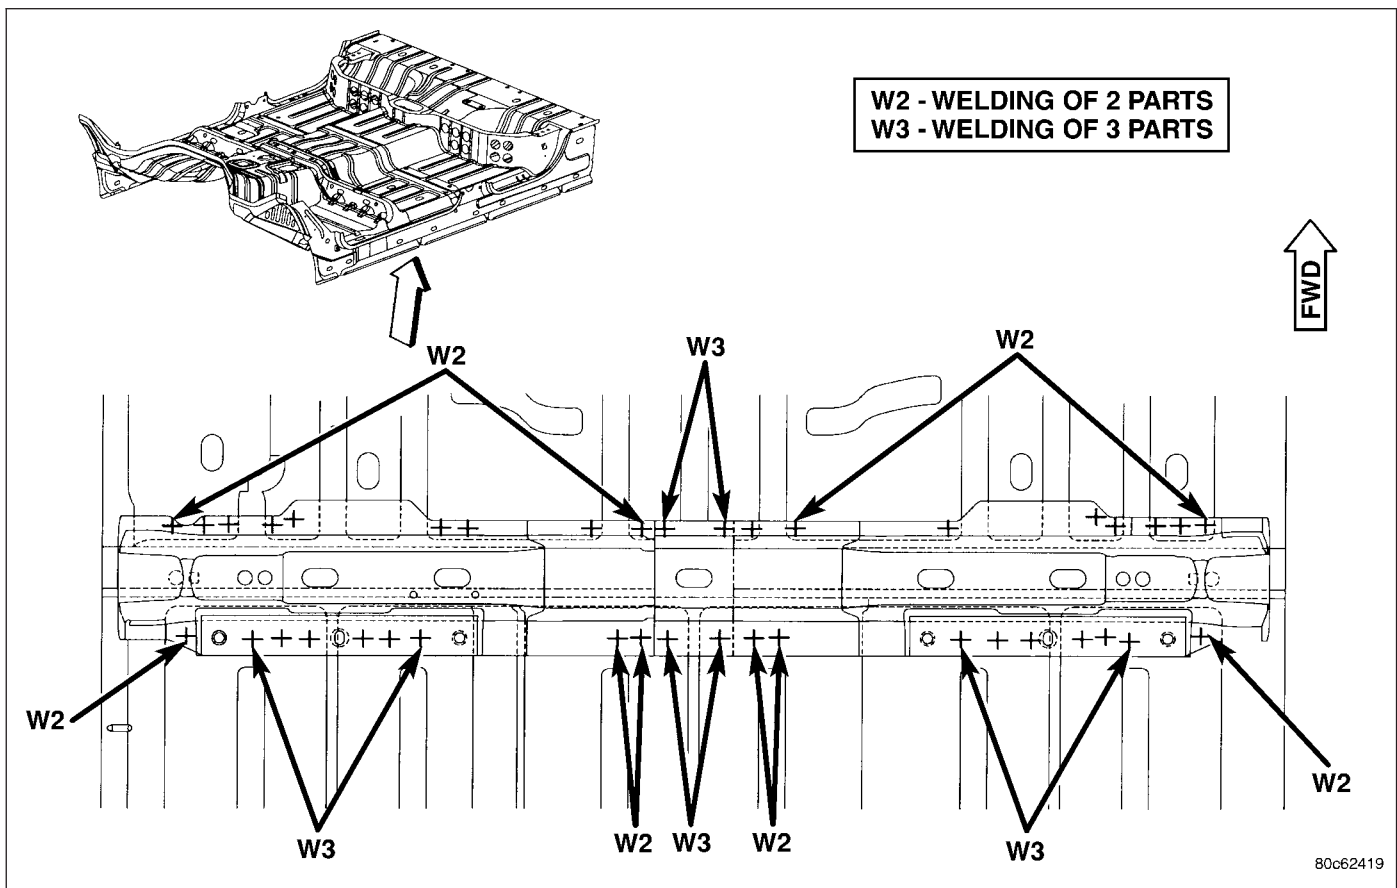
RIGHT REAR FRONT SEAT MOUNTING CROSSMEMBER - QUAD CAB
